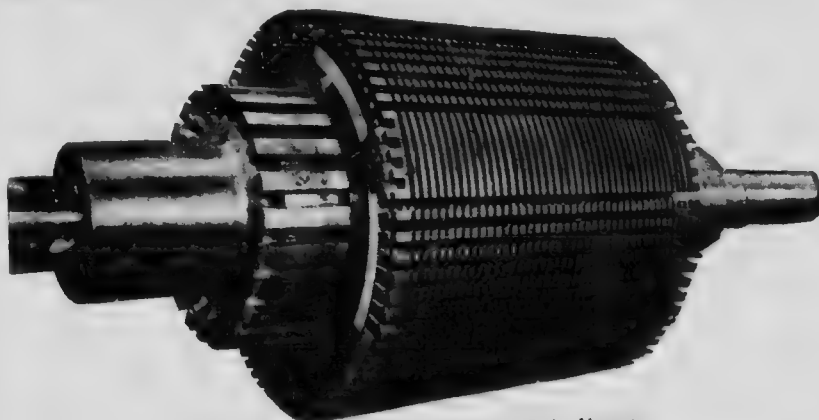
Construction of Rotor for Large Turbo-Alternators.
